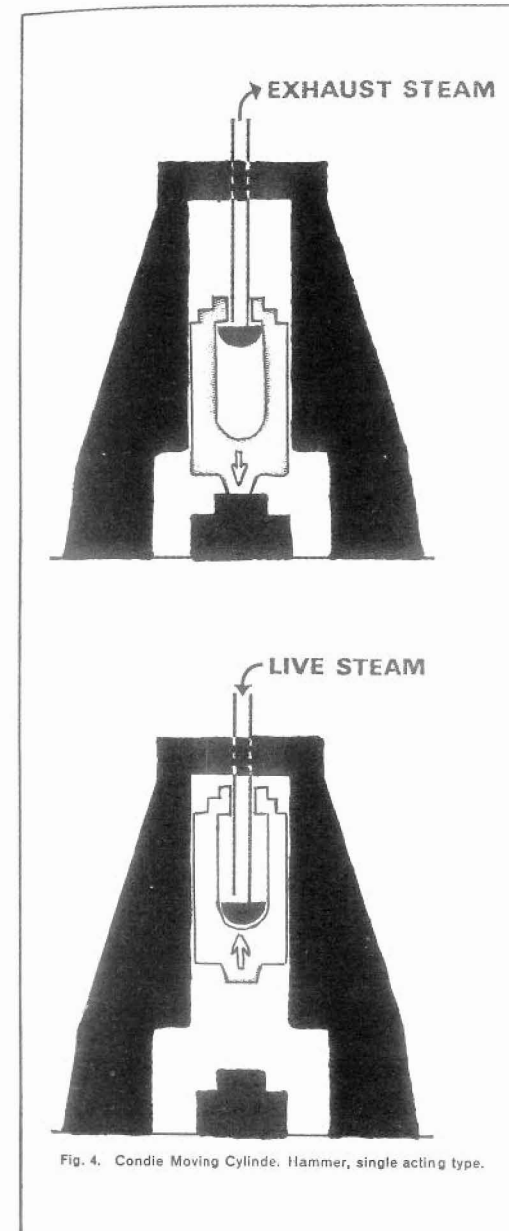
Condie Moving Cylinder Hammer, single acting type.
